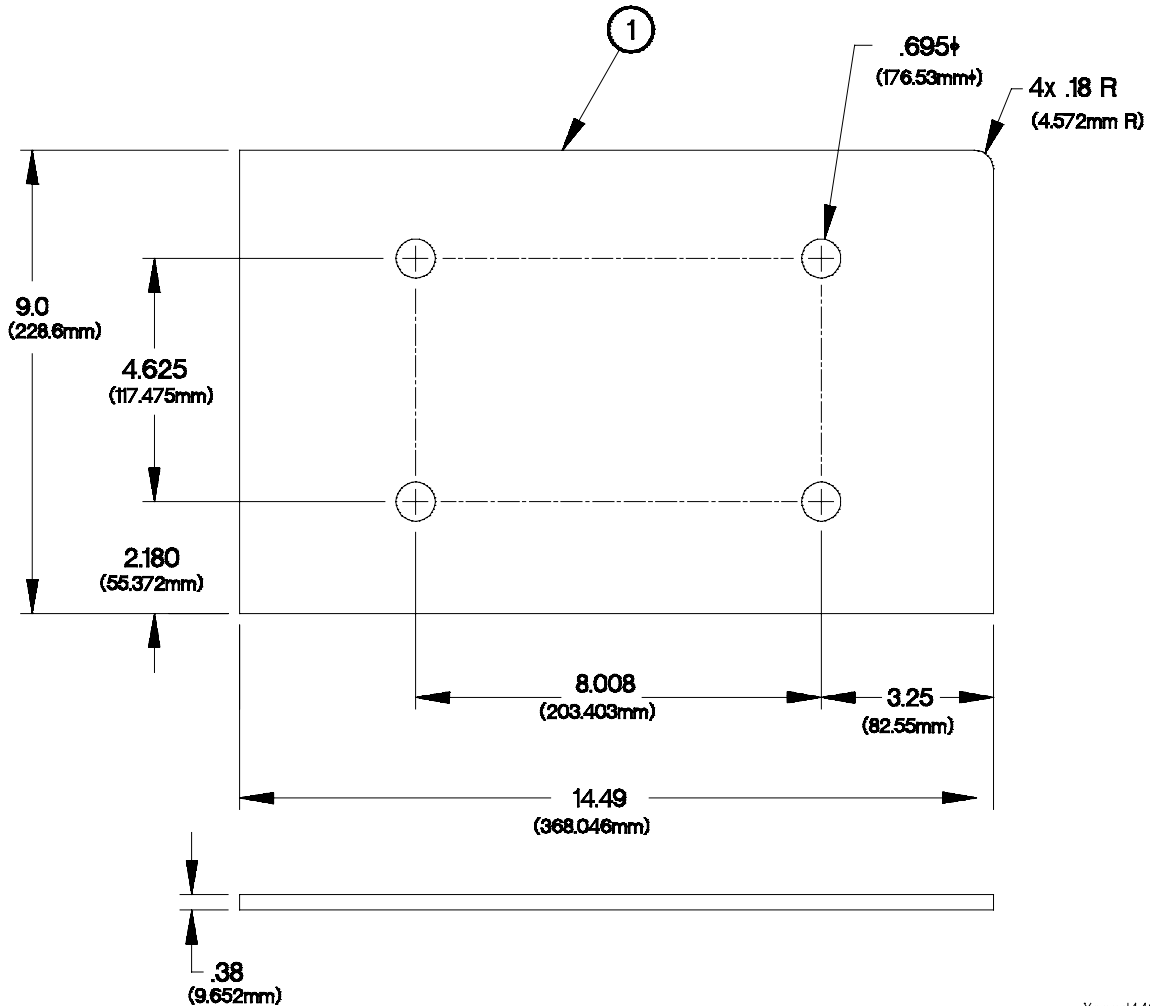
Transmission Lift and Mounting Bracket Assembly
